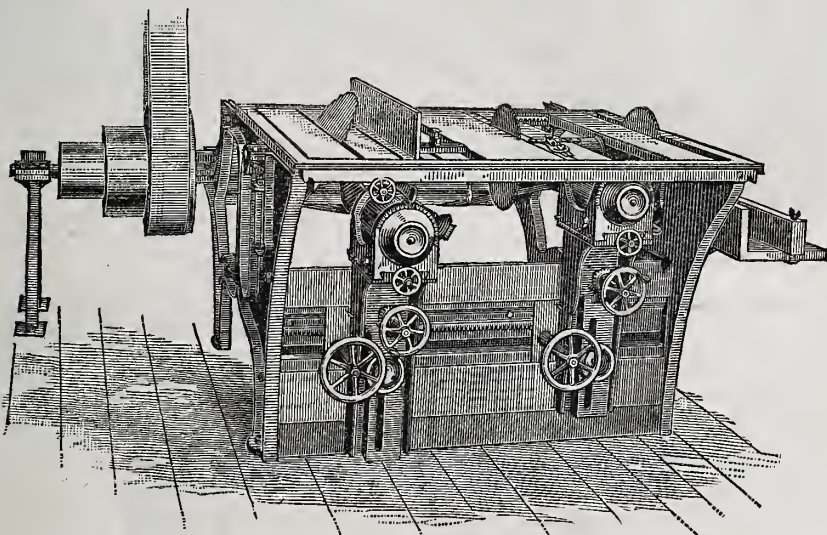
Holt's Universal Wood-Worker in the Form of Irregular Molder.
